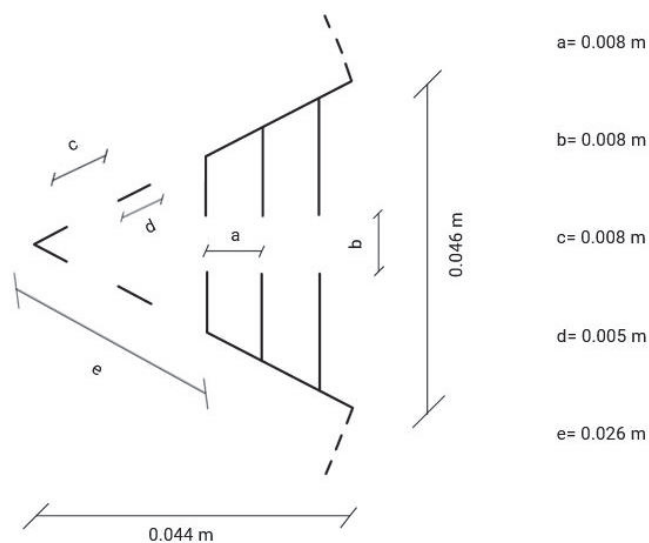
Dimensions of the metamaterial unit formed in the folded state for Design 1.
